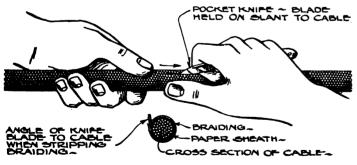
Cutting away the braiding of a cable preparatory to forming. The knife blade is held at an angle to prevent cutting through the paper sheath and injuring the wires.
